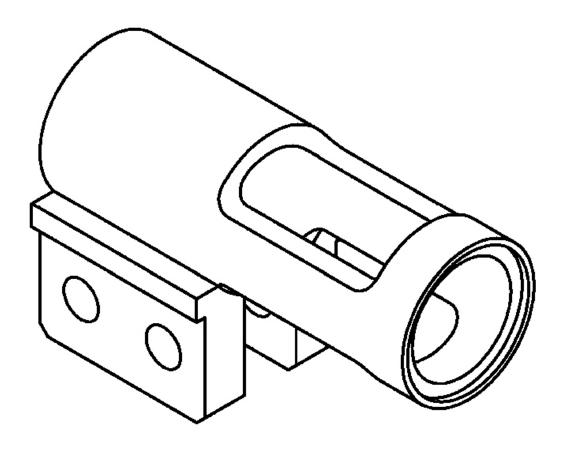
Valve Spring Tester C-647 Courtesy of CHRYSLER LLC
